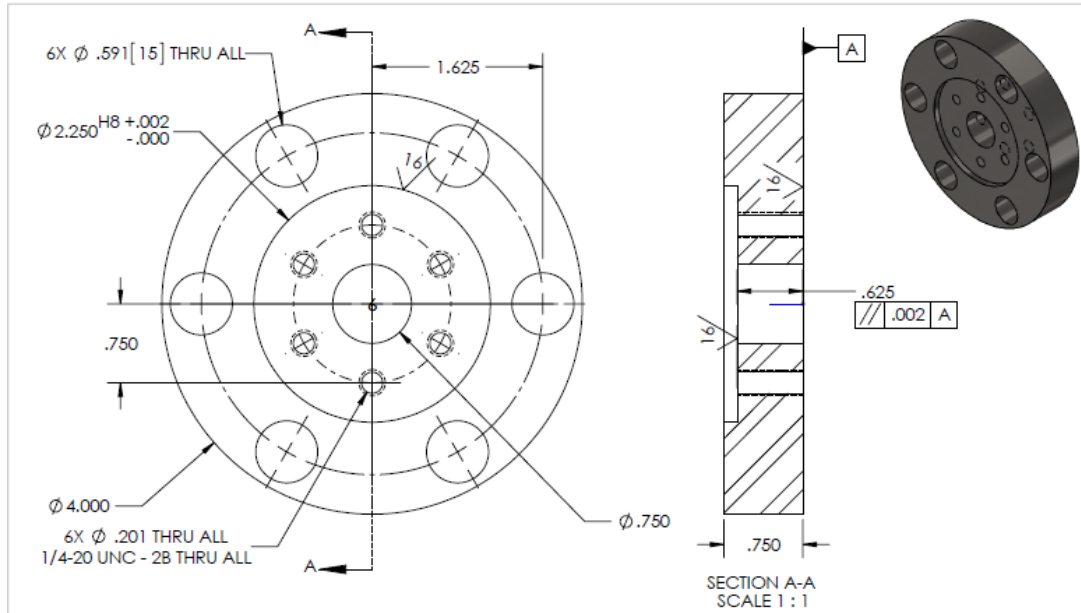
Schematic for base to adapt the X52 SNTT fixture.
